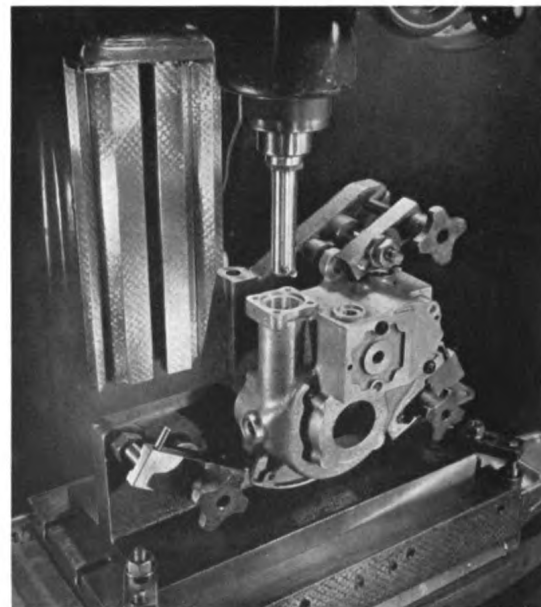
Jig Boring deep hole with solid type boring bar.
